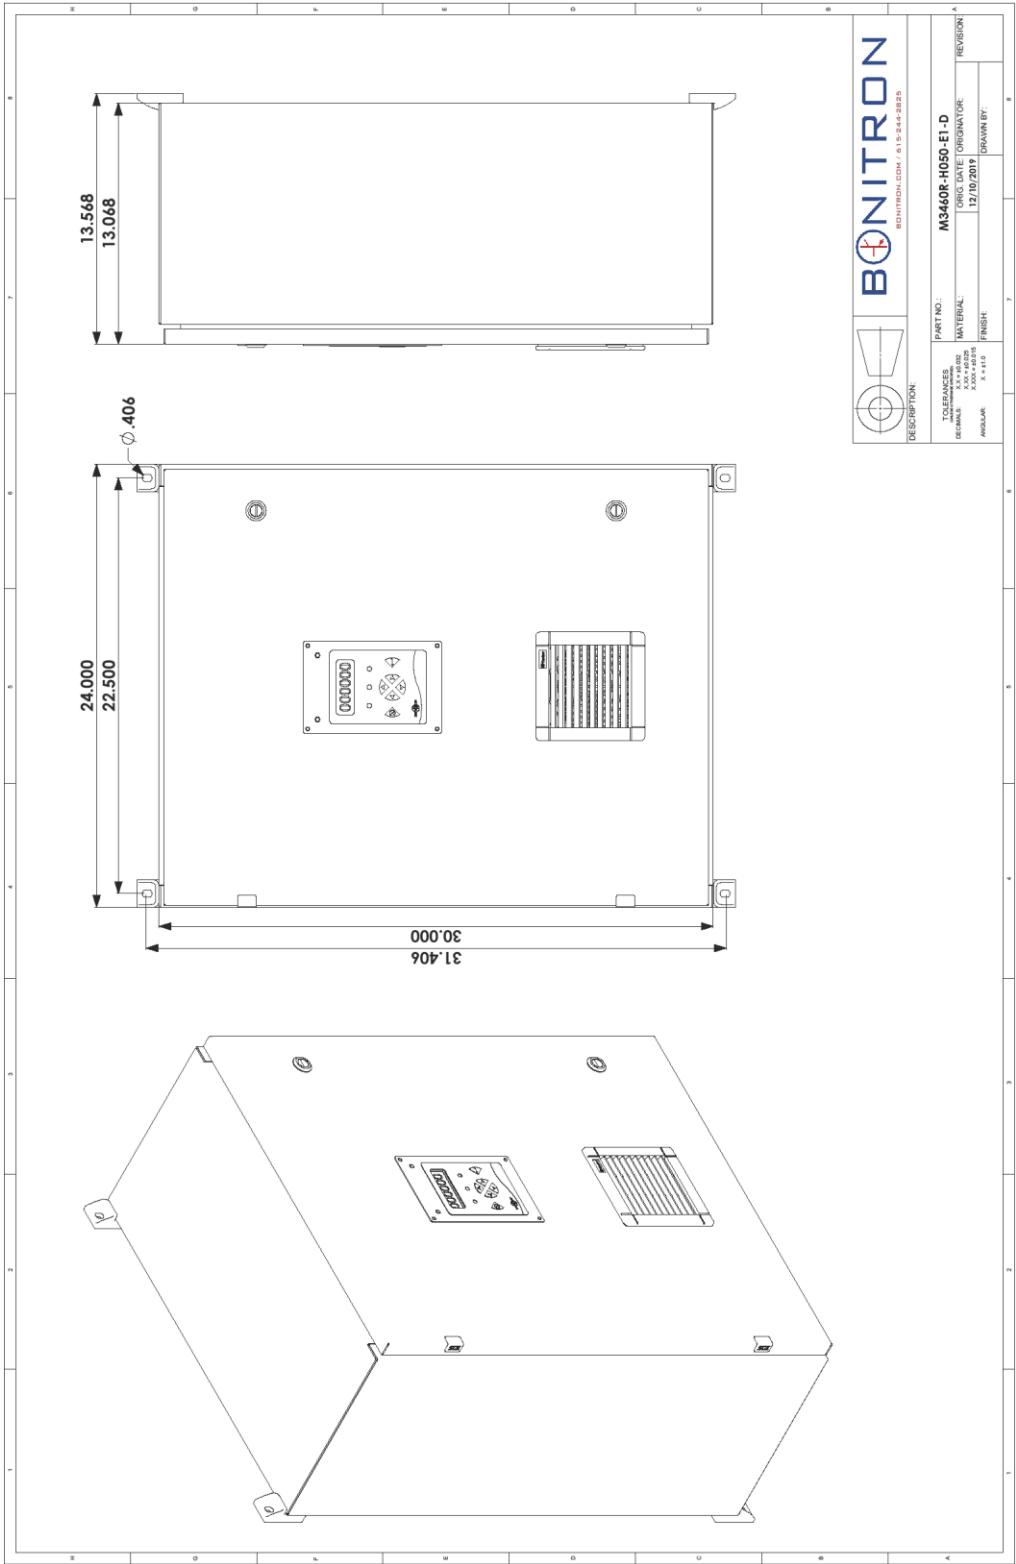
M3460-E2 Enclosure Dimensional Outline
